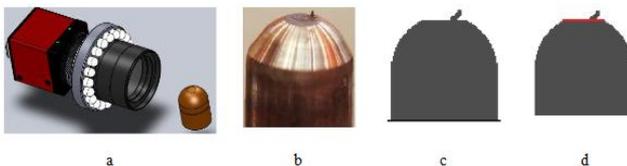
Showing sensing methods of welding tip geometry - version No.1
